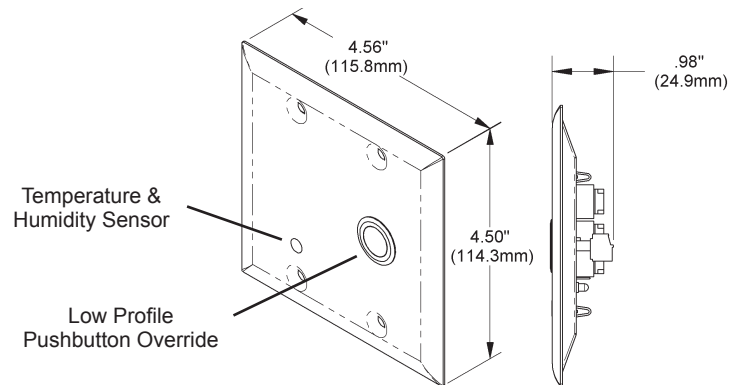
Doublegang Washdown Wall Plate Unit with Low Profile Pushbutton Override
